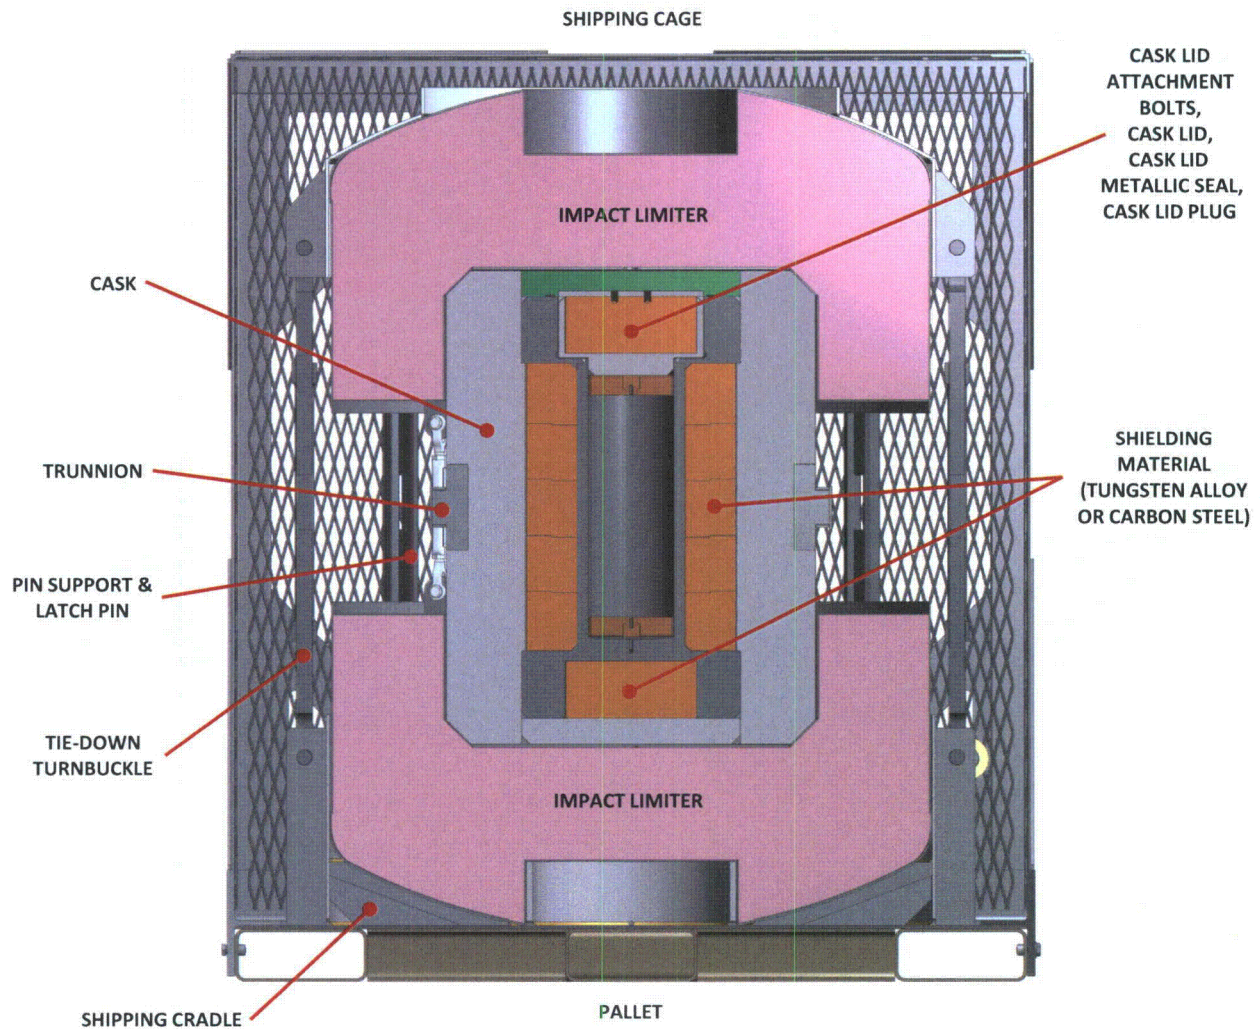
Assembled Transport Package Cutaway – Model AOS-050A
